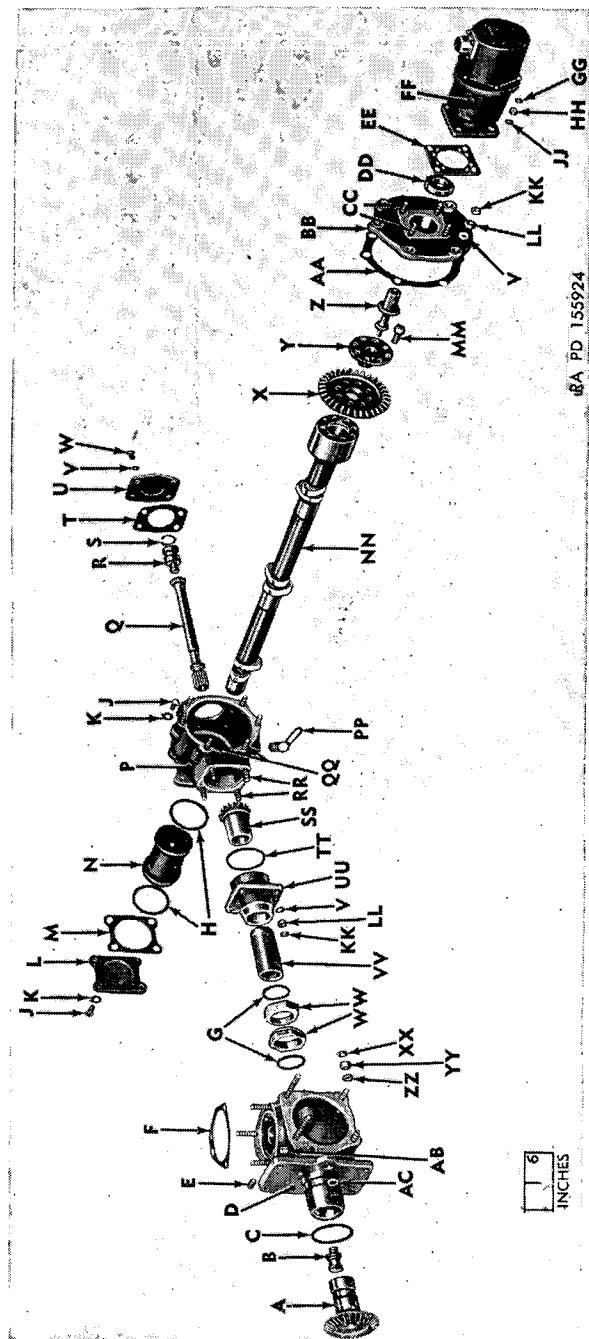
Camshaft and drive-right (1-3-5) side—exploded view.
